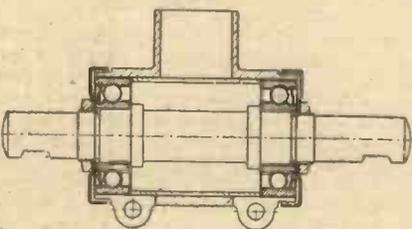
Modified form of the bearing shown in Fig. 3.
